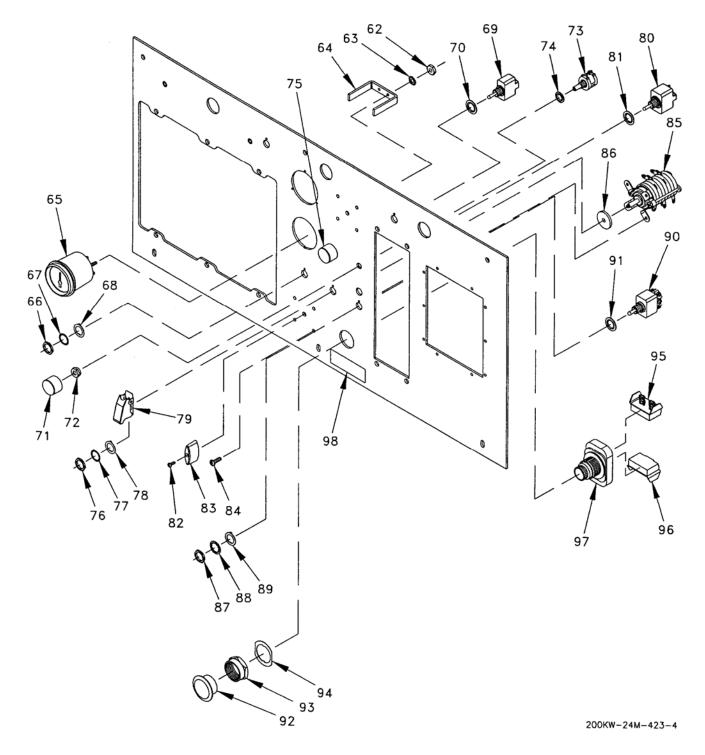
Control Box Panel Assembly (Sheet 4 of 4).
